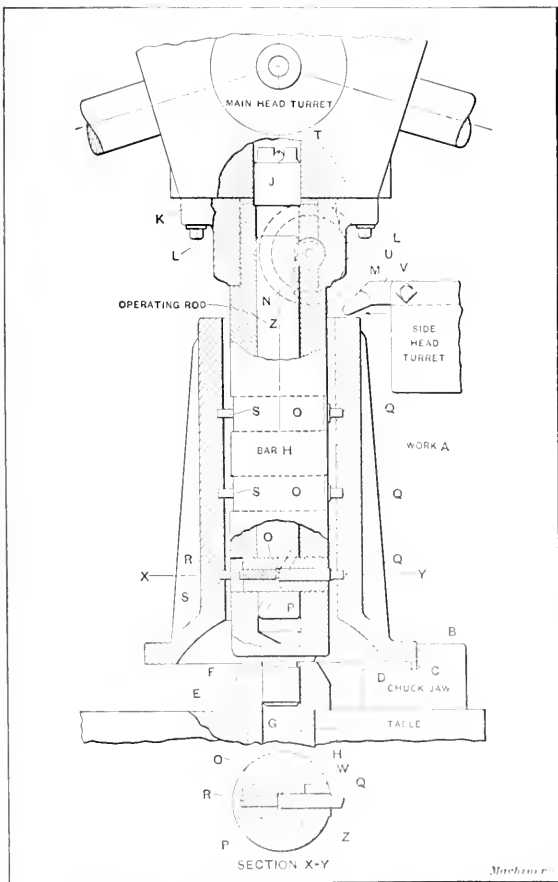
Another Multiple Recessing Tool used in a Vertical Turret Lathe
